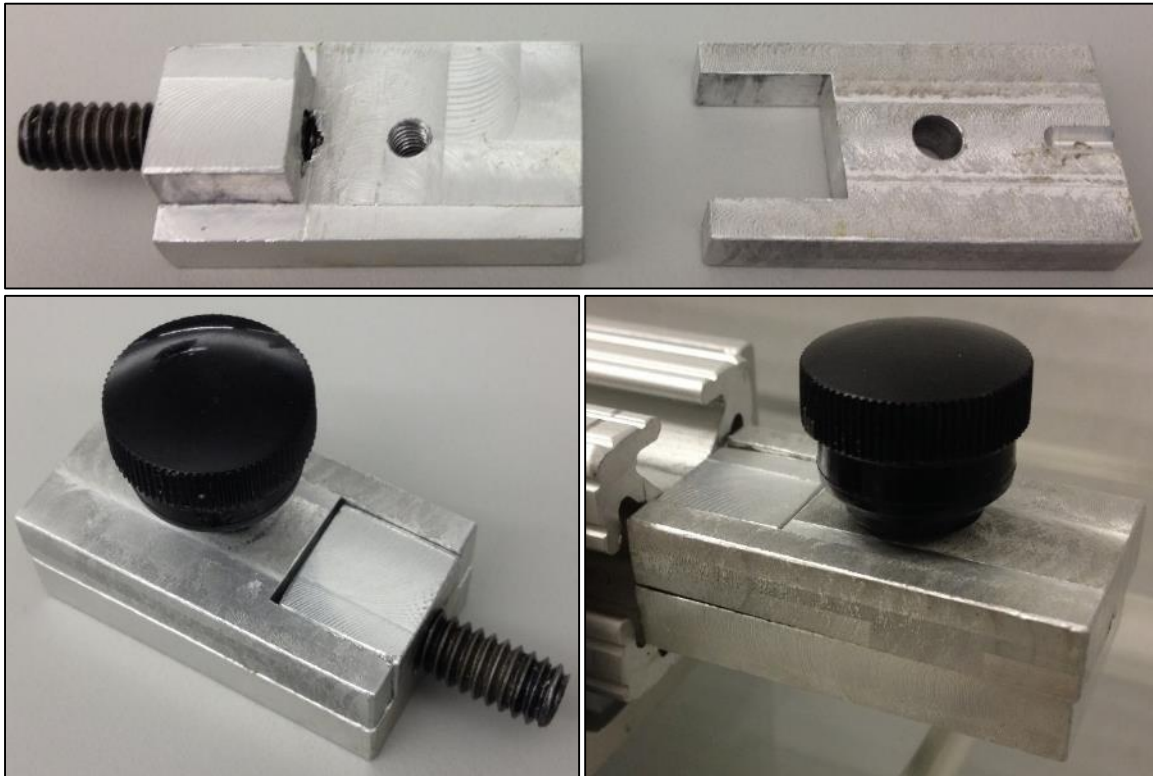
Completed catheter clamp. Top, disassembled bottom and top of the clamp; Bottom-left, assembled clamp; Bottom-right, clamp screwed into 80/20 bar.
